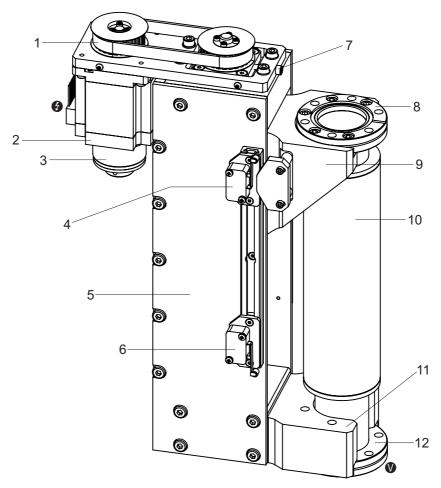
Manipulator, used terms (view without tooth belt cover)
